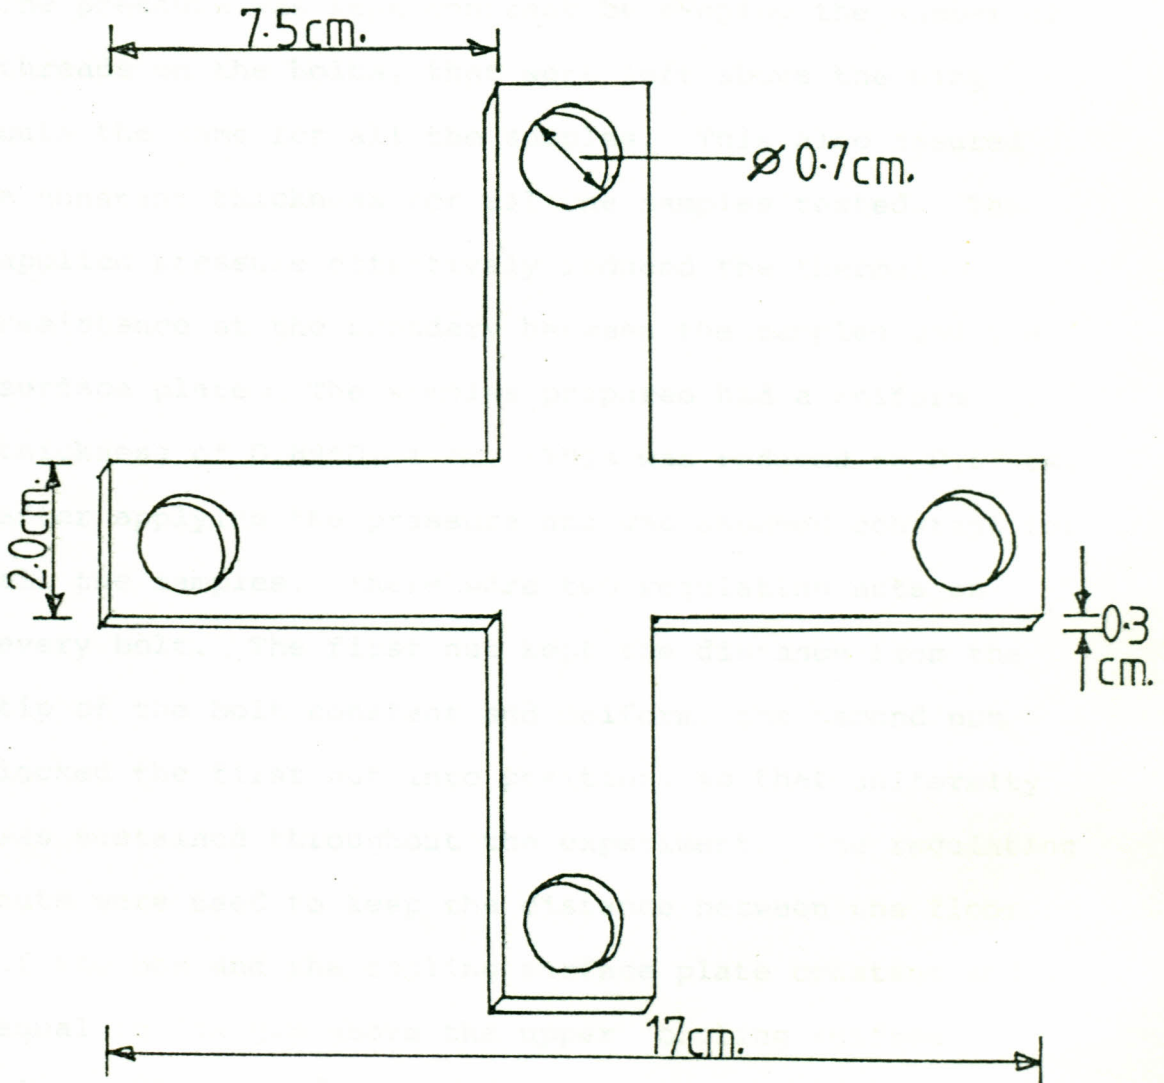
Crossbar used to clamp the samples in the guarded hot plate apparatus.
